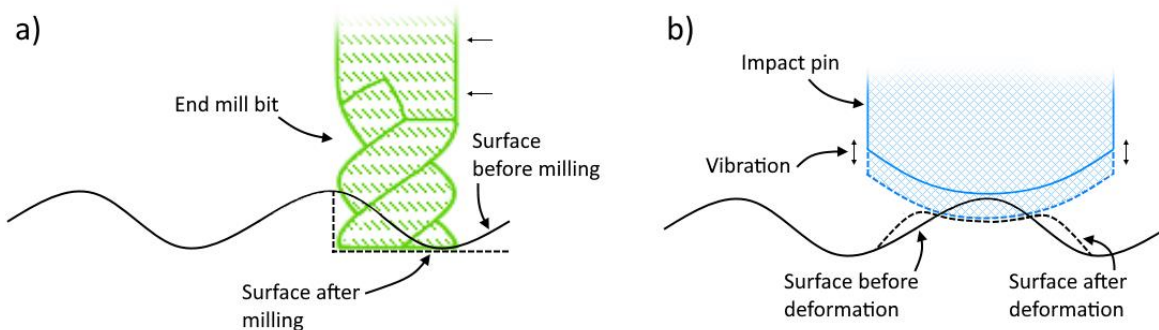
Mechanical surface modification process showing a) milling and b) impact treatment of a surface
